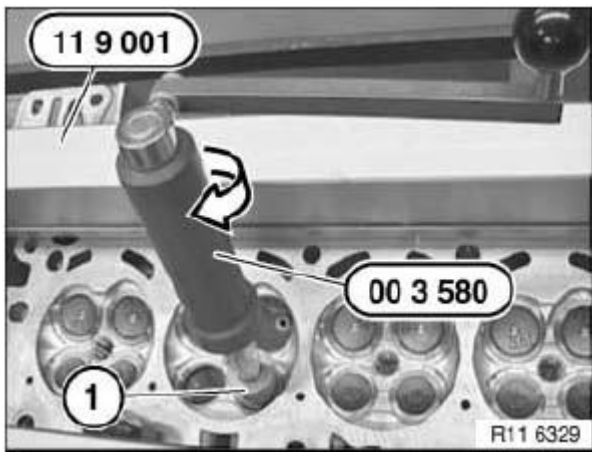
Identifying Special Tools (11 9 001), (00 3 580) And Valve Seat Milling Cutter
